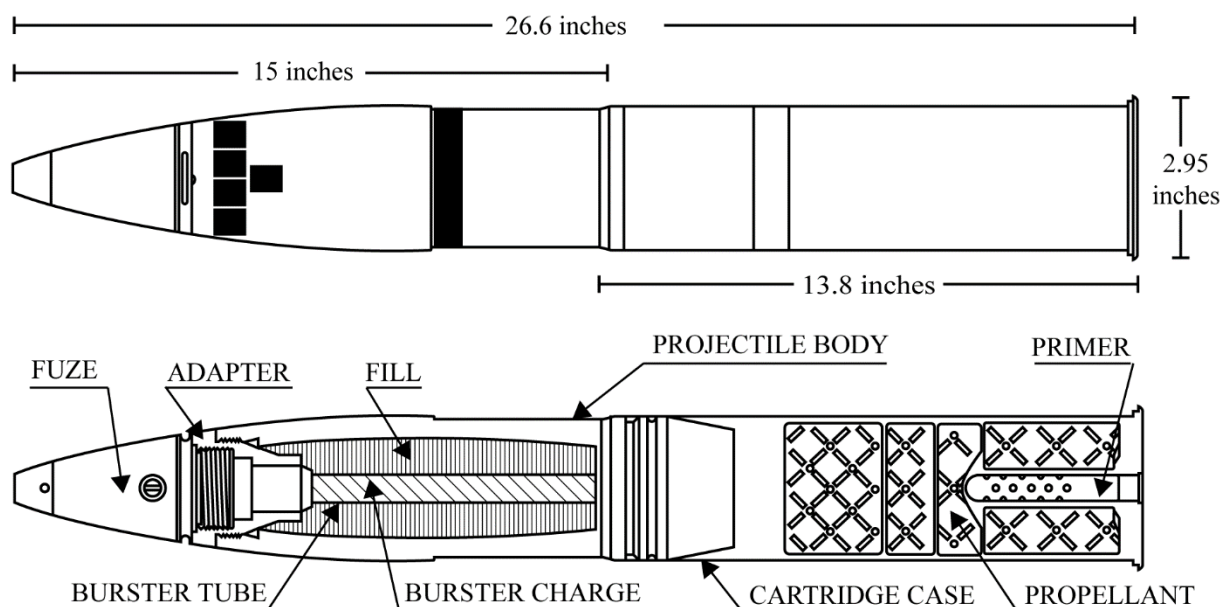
Projectile, 75-mm, M64 - Line Drawing
